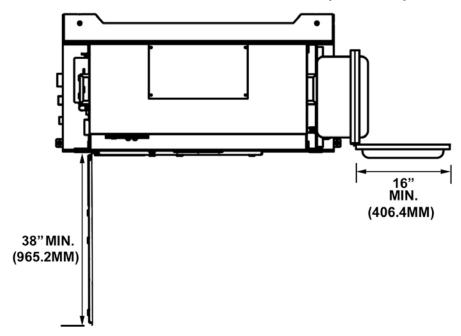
Required Opening Clearances for Cabinet Door and Electrical Panel
